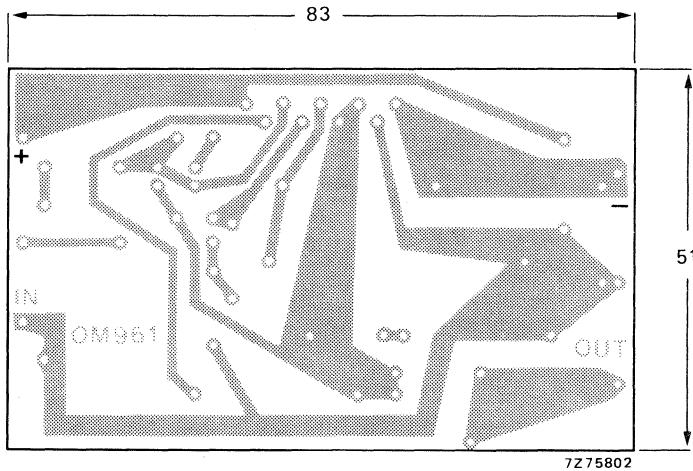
Component side of DIL-version; for component layout see Fig. 6.
